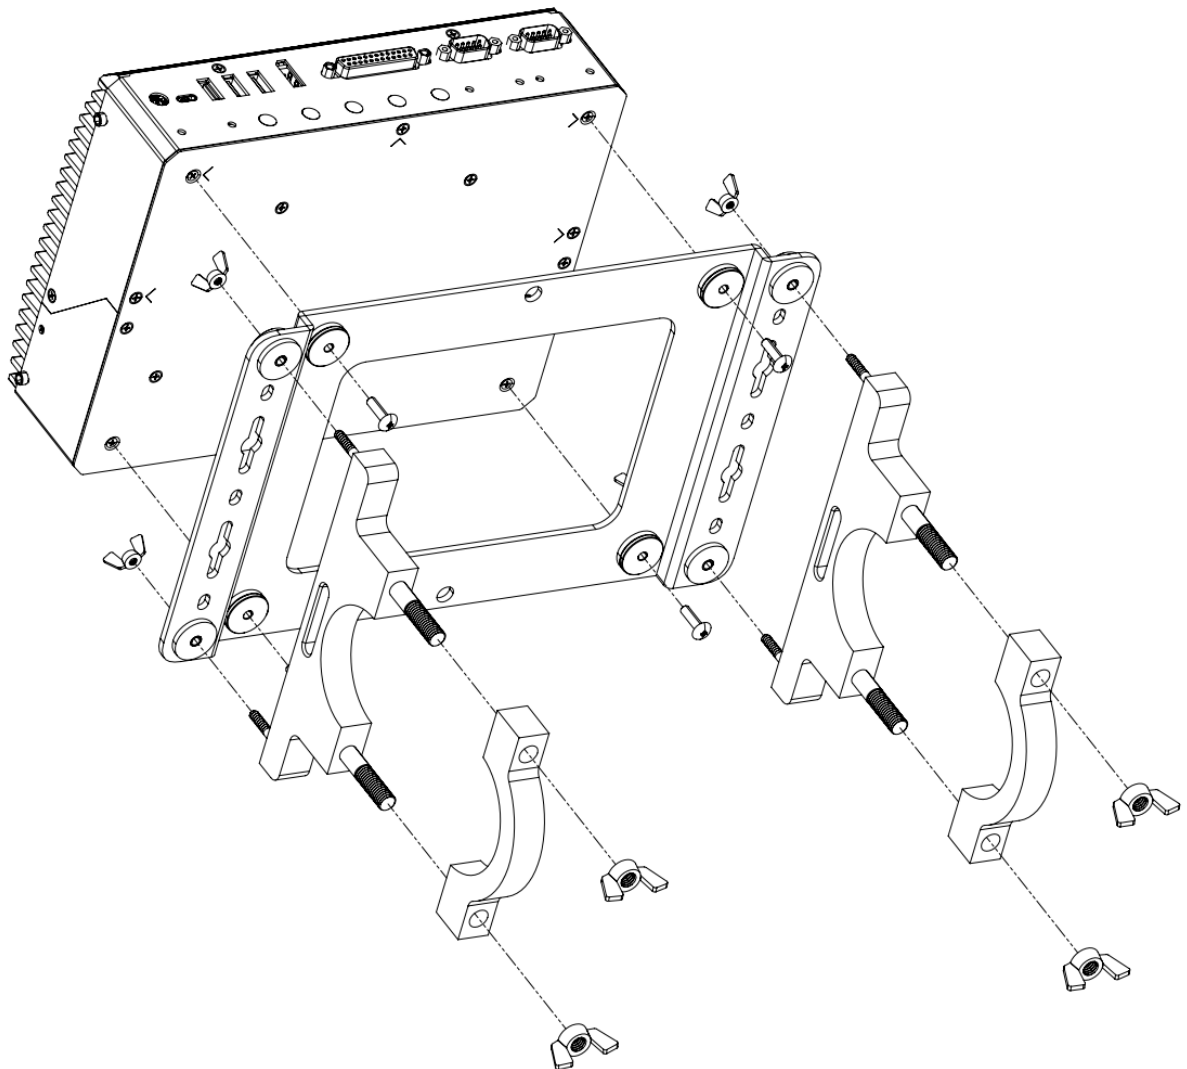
WayFinder Hub mounting plate and RT-Strut brackets
